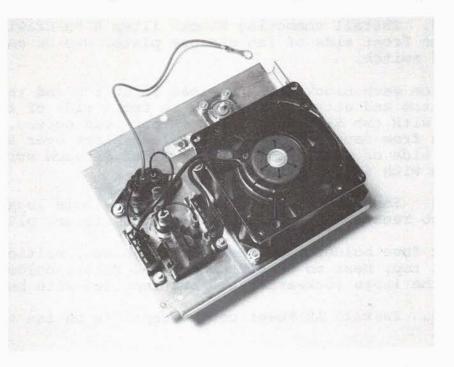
Sol-20 fan closure plate assembly. (Top of plate in foreground.)
